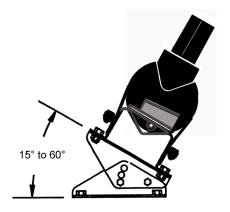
Molded Curent Limiting Fuse with Tilt Mounting Adapter, Side View
